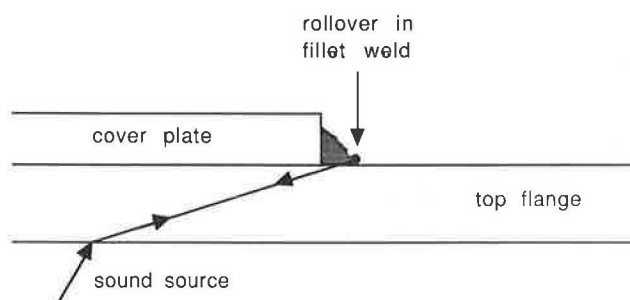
Sound reflection from irregularity in weld surface: rollover in fillet weld.
